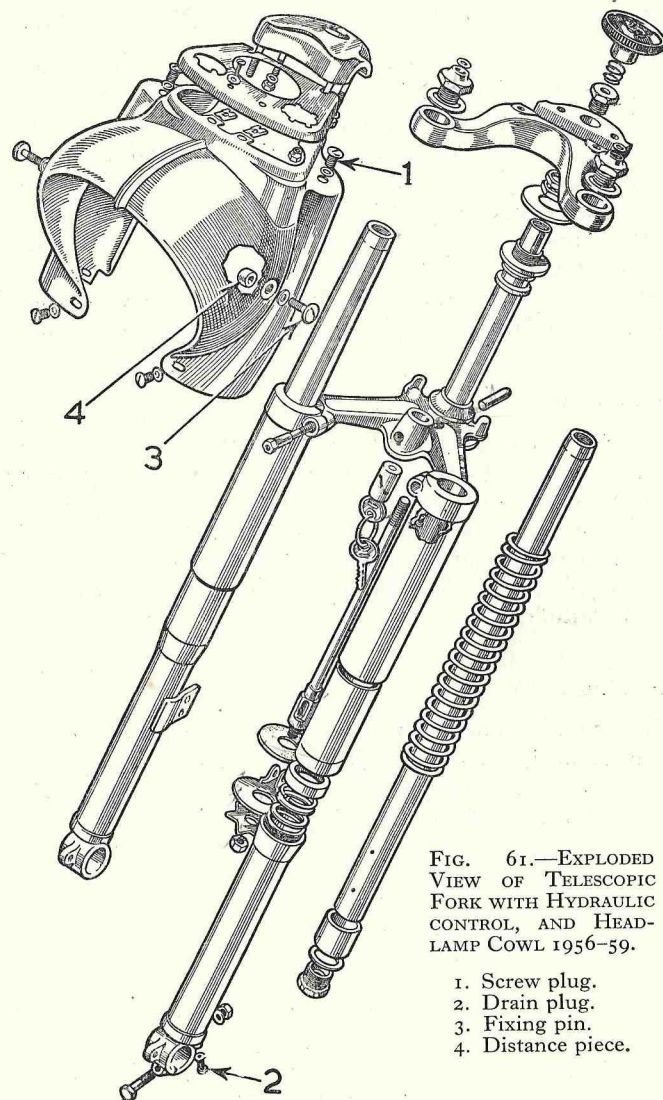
EXPLODED VIEW OF TELESCOPIC FORK WITH HYDRAULIC CONTROL, AND HEAD-LAMP COWL 1956-59.
